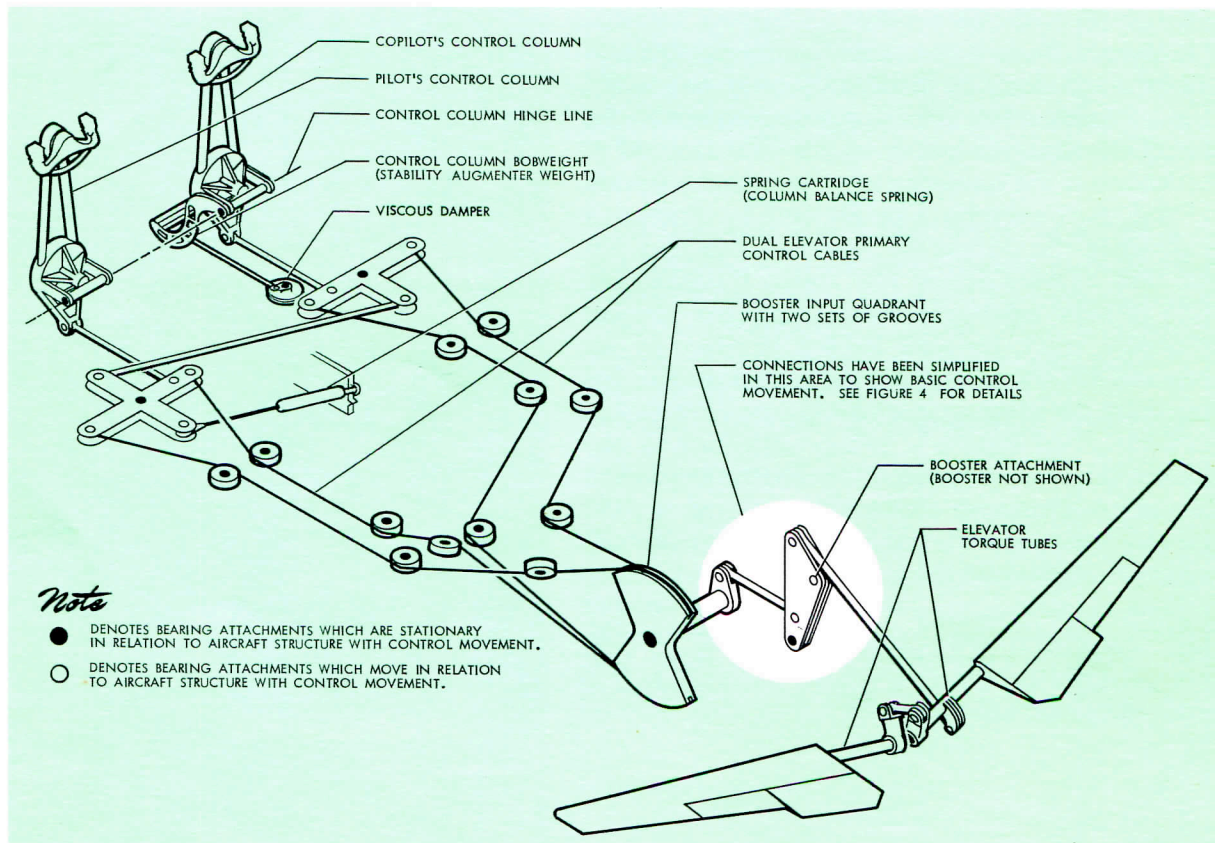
View Inside Fuselage Looking Aft Towards Elevators
